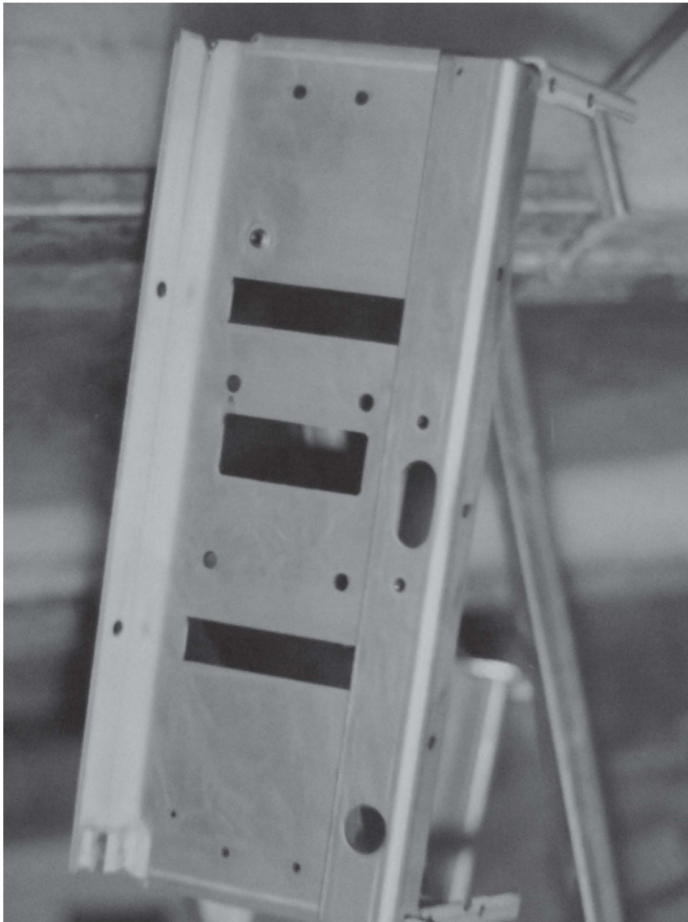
Aluminum surface cleaned too strongly and then conversion coated.
